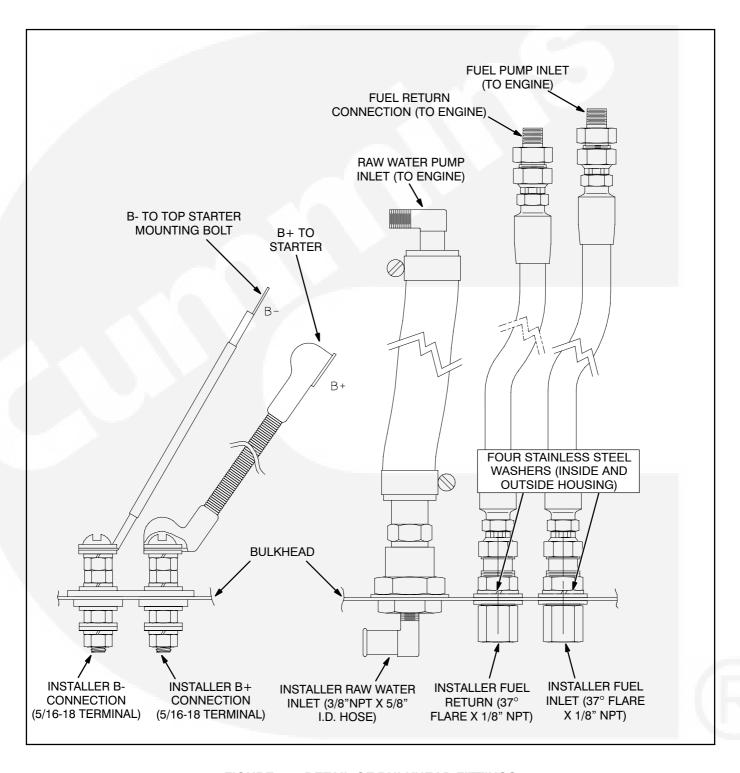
DETAIL OF BULKHEAD FITTINGS
